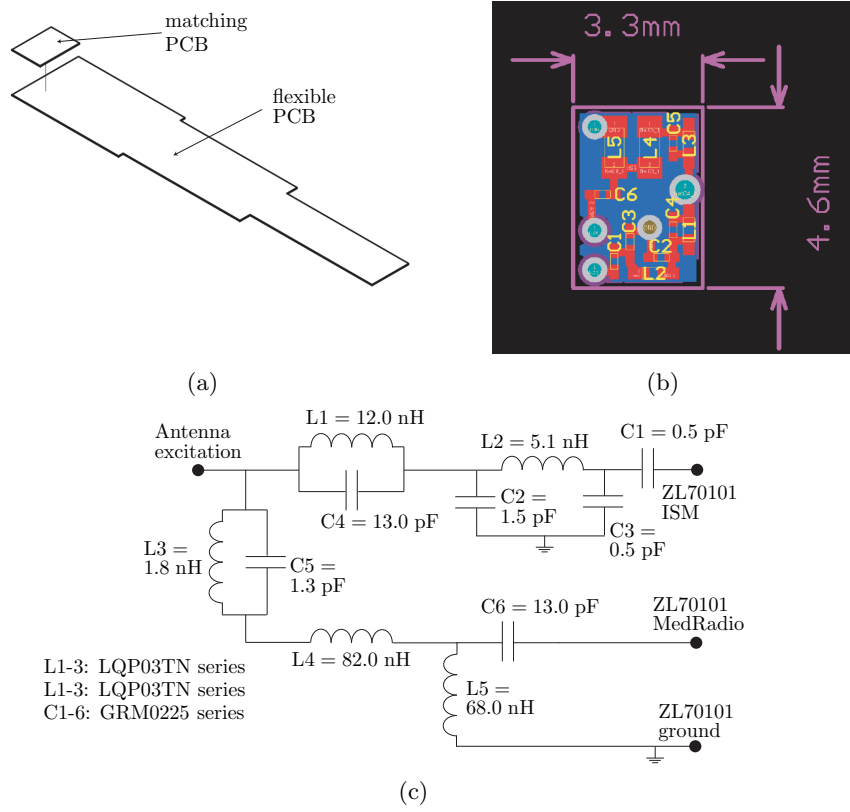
Matching circuit PCB: (a) sketch of the matching board and its position on the flexible PCB, (b) top view with dimensions [mm] and position of each component, and (c) schematics identifying the discrete elements (produced by Murata Manufacturing Co., Ltd.).
